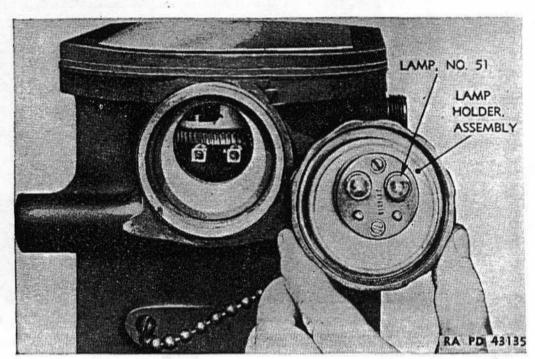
Elevation indicator M5-lamp holder, assembly.
